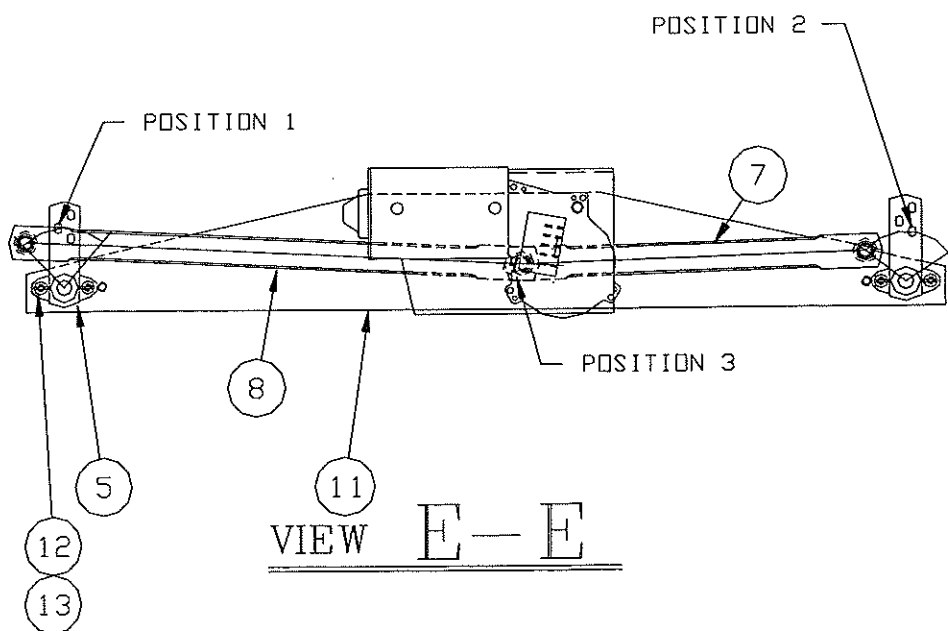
TYPICAL WIPER SYSTEM INSTALLATION (A83432, SHEET 3 OF 3)
